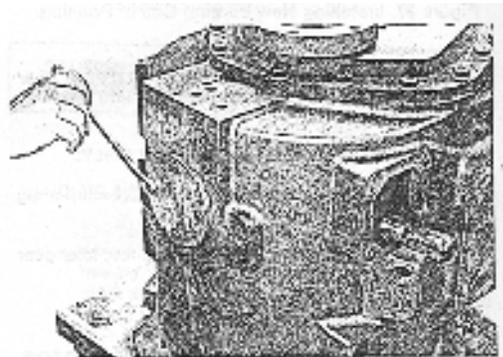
Installing Junction Block. Use screwdriver (shown right) or bar to support rear commutator.
